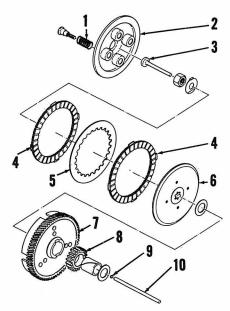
Clutch assembly used on JT-1 models.
